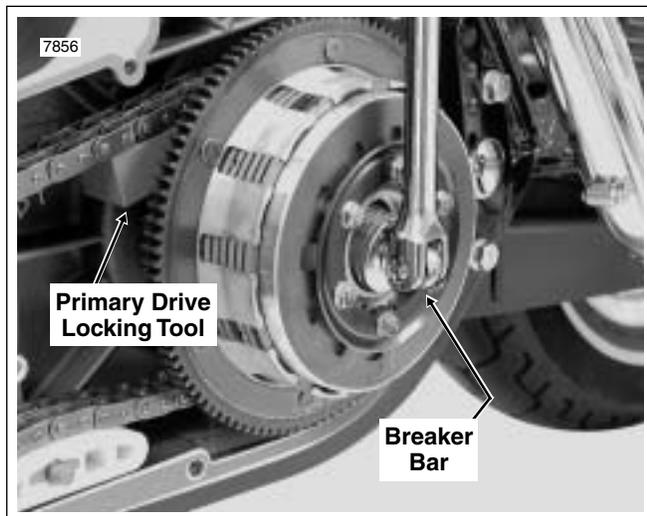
Place Primary Drive Locking Tool and Loosen Clutch Hub Mainshaft Nut
